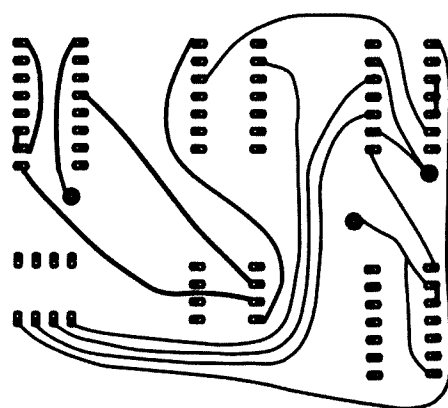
Parts placement for the printed circuit board of Fig. 2.
